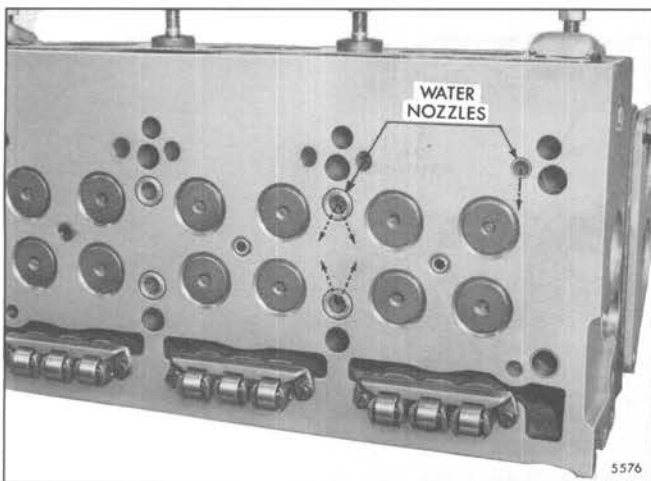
Location and Position of Water Nozzles in Cylinder Head
